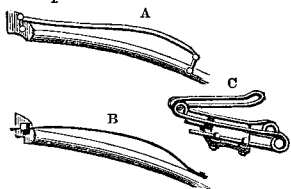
A, SHACKLE SPRING; B, HUMBER'S SLIDE; C, ARAB CRADLE SPRING.
